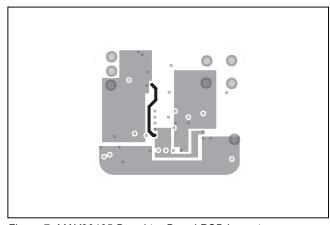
MAX30105 Daughter Board PCB Layout—Component Side
